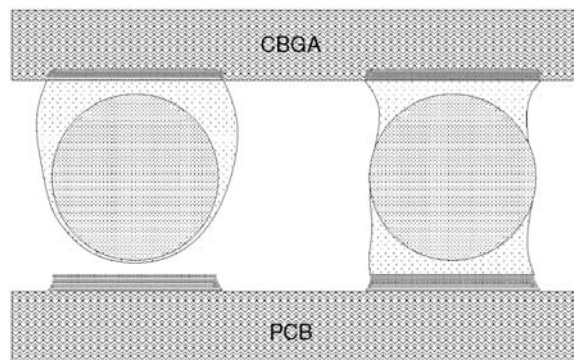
Cross-section of CBGA solder joints showing opens caused by pad contamination [10]
